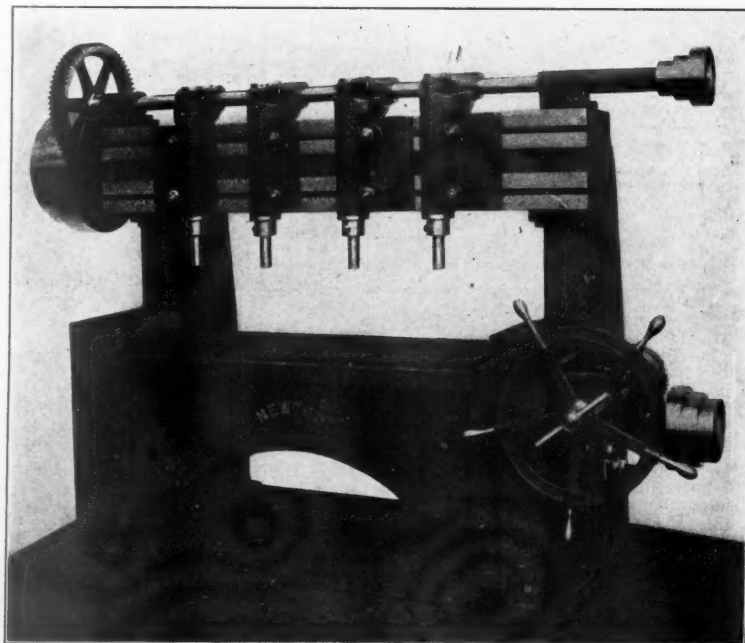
The Newton Four-Spindle Brake Lever Drill.
